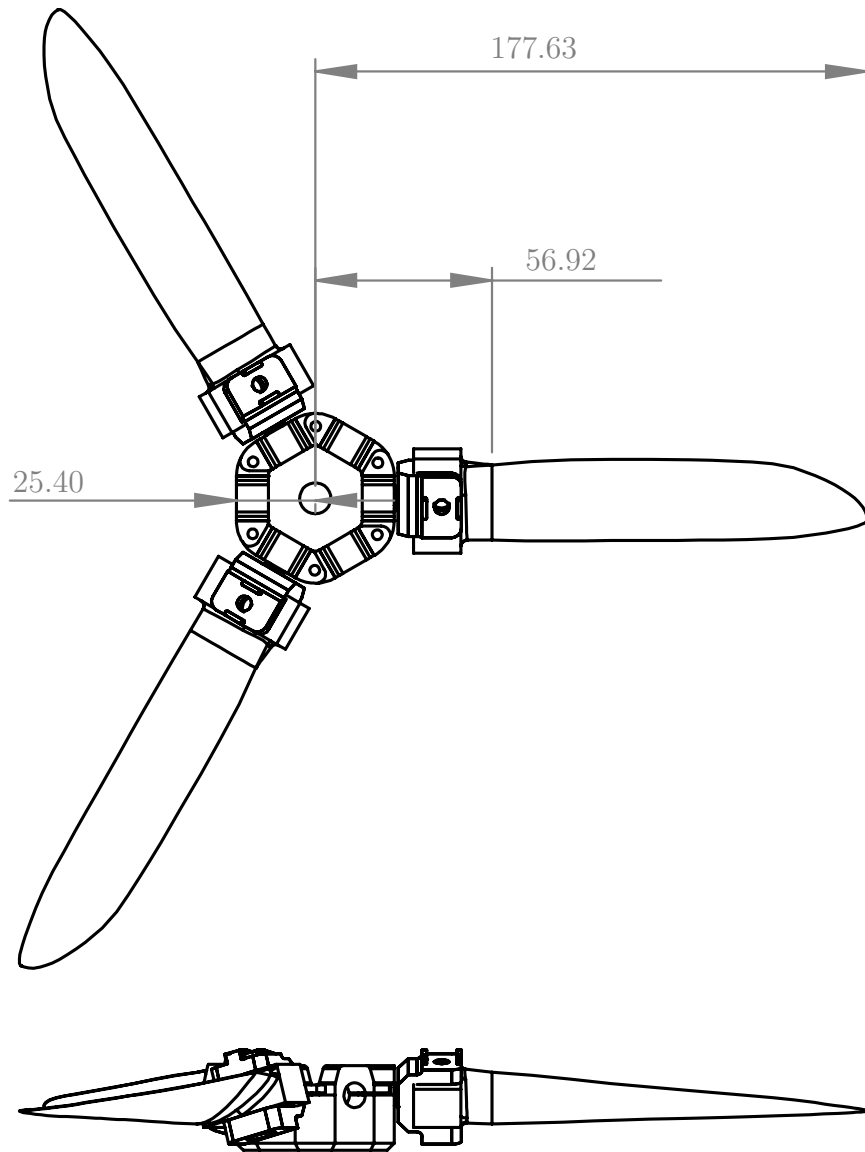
CAD drawing of the variable pitch rotor assembly showing axial and edgewise views, including the 3D-printed blades, and the aluminium blade grips and hub. All dimensions are in mm.
